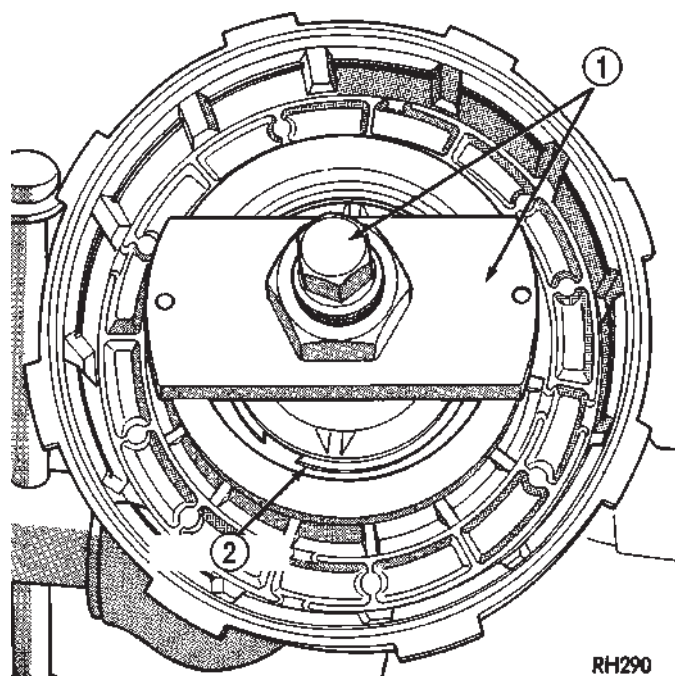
Removing Front Clutch Spring Retainer Snap-Ring
